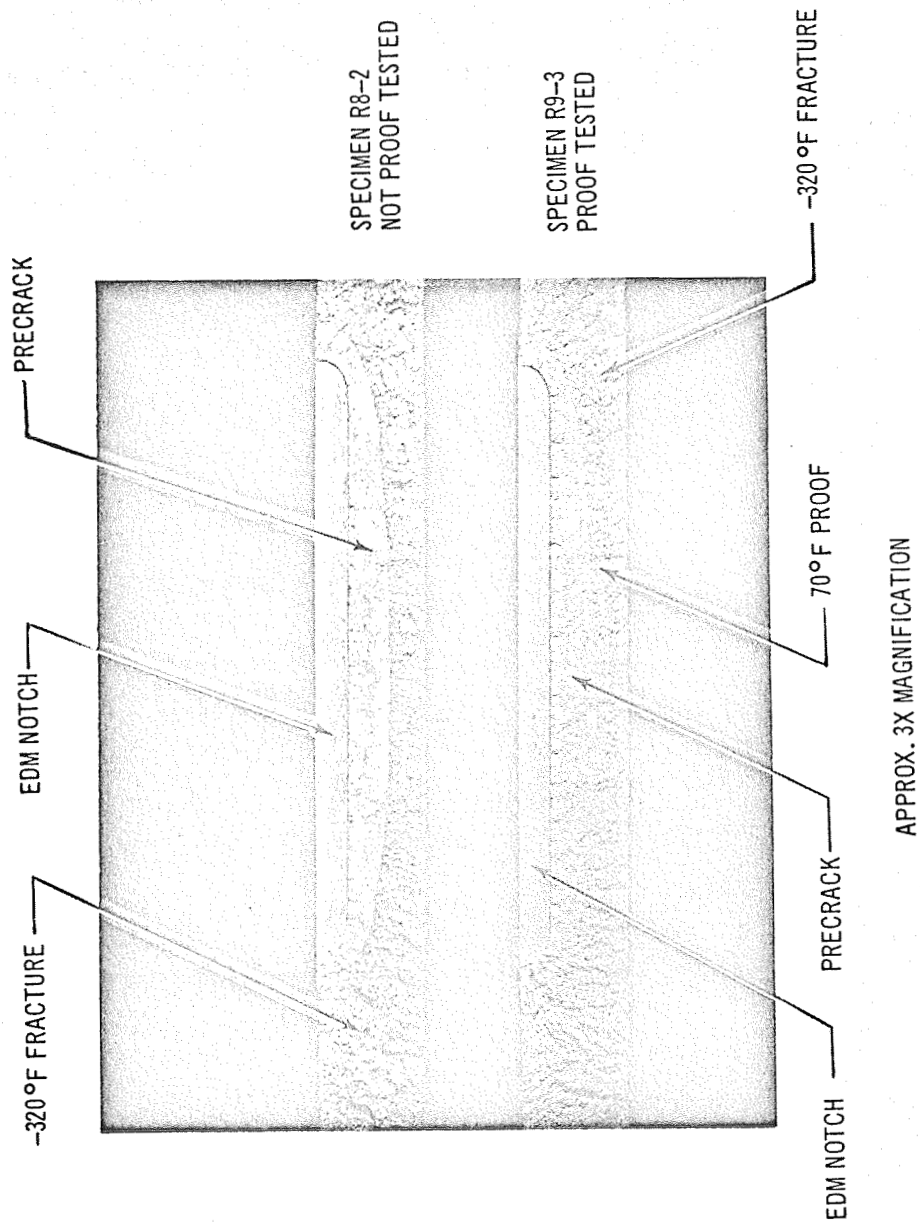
Flaw Growth in Uniform Thickness Welds During Proof Testing
